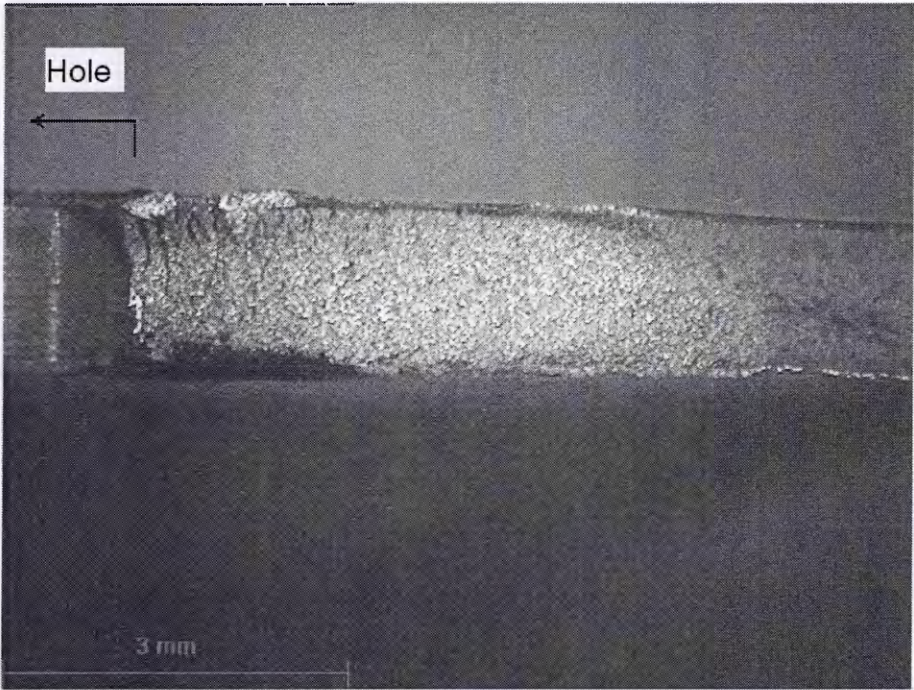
Front fracture surface from testing configuration 1 (Table 6.1.1)
